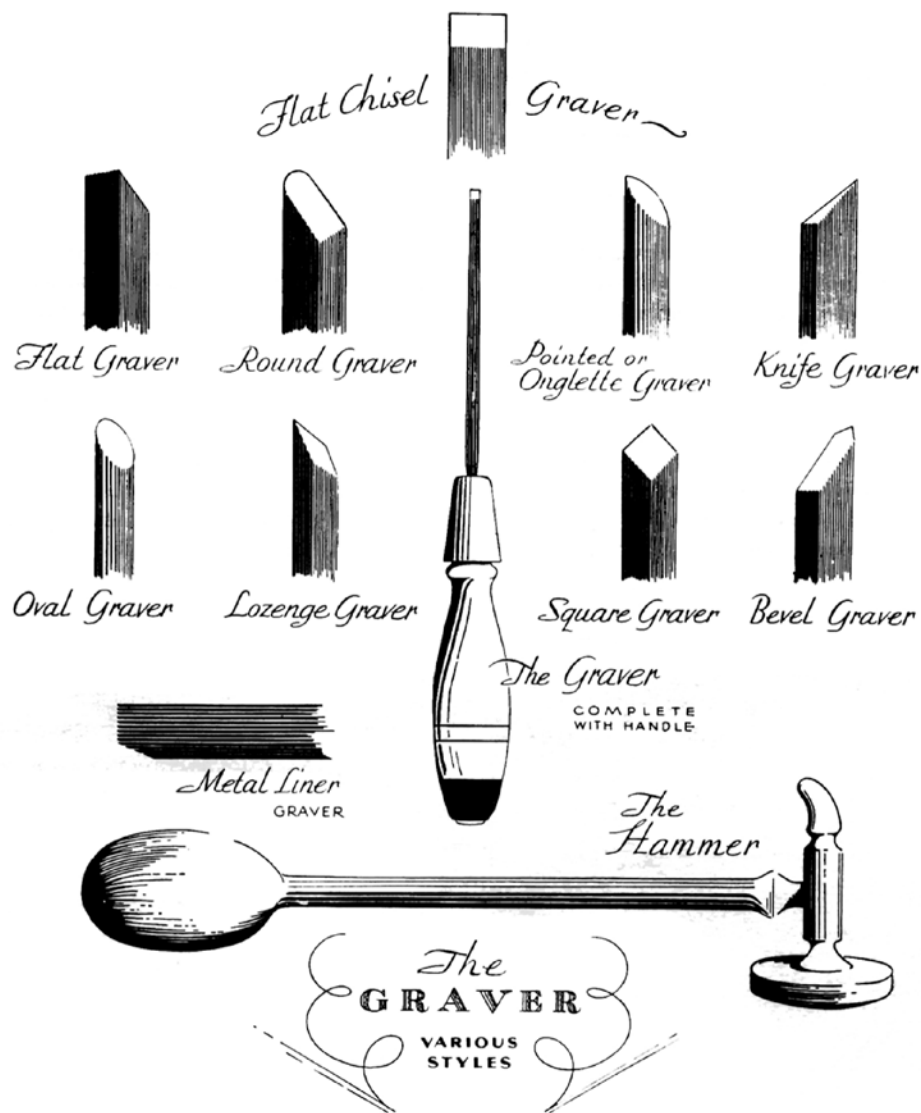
The basic tools of the gun engraver are simple. However, final success depends on the vision and skill of the most important tool of all — the gun engraver.
